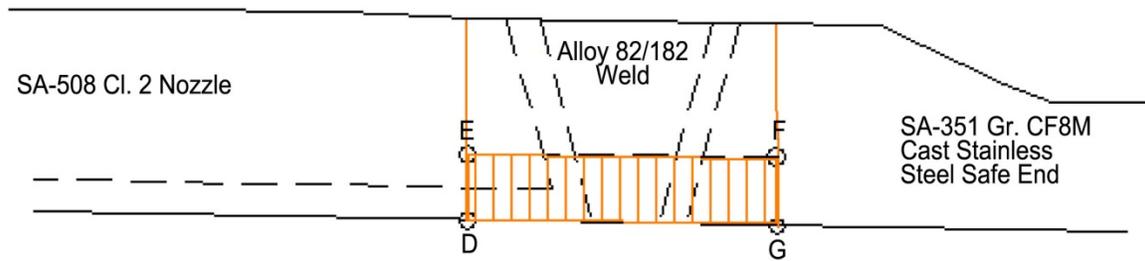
Pressurizer Safety and Relief Nozzle Weld Circumferential Scan CRV Coverage Assessment
